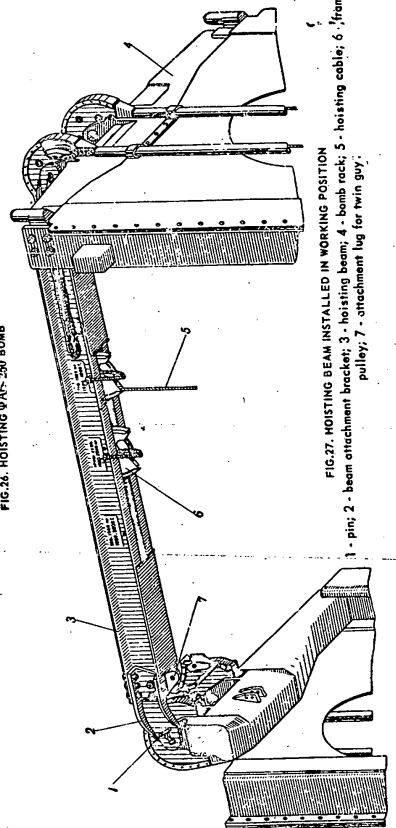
HOISTING BEAM INSTALLED IN WORKING POSITION
